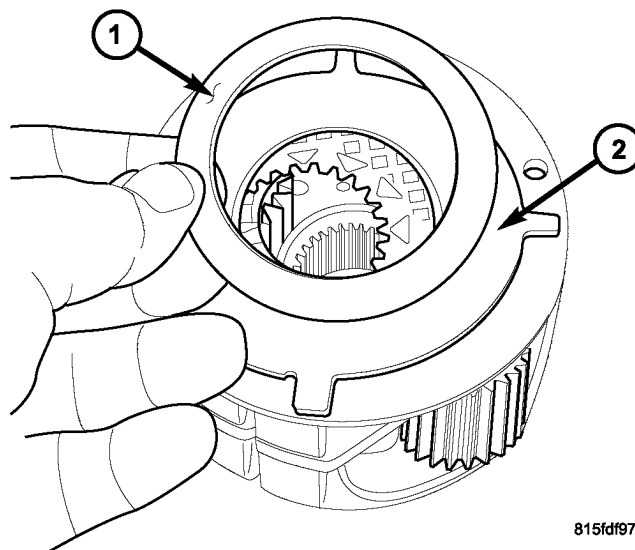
REMOVE PLANETARY BELLEVILLE SPRING
